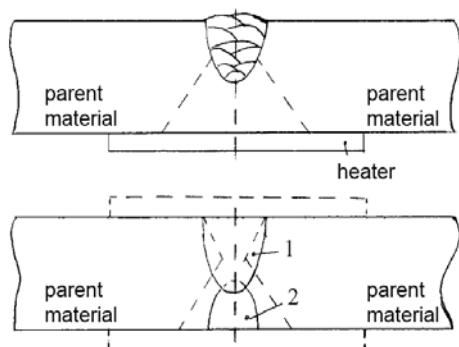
Repair welded joints: one side (up) and both side welds (down).
